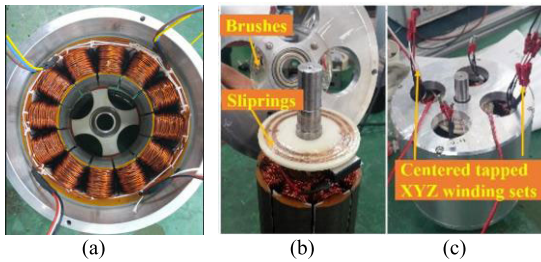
Prototype Machine. (a) Stator. (b) Rotor. (c) Assembled Prototype.
